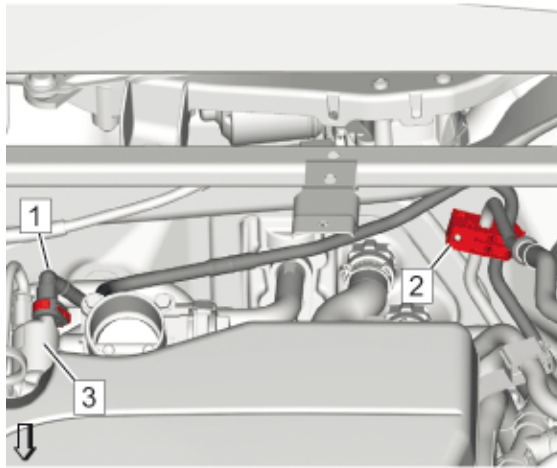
Evaporative Emission Canister Purge Solenoid Valve And Evaporative Emission Pipe
